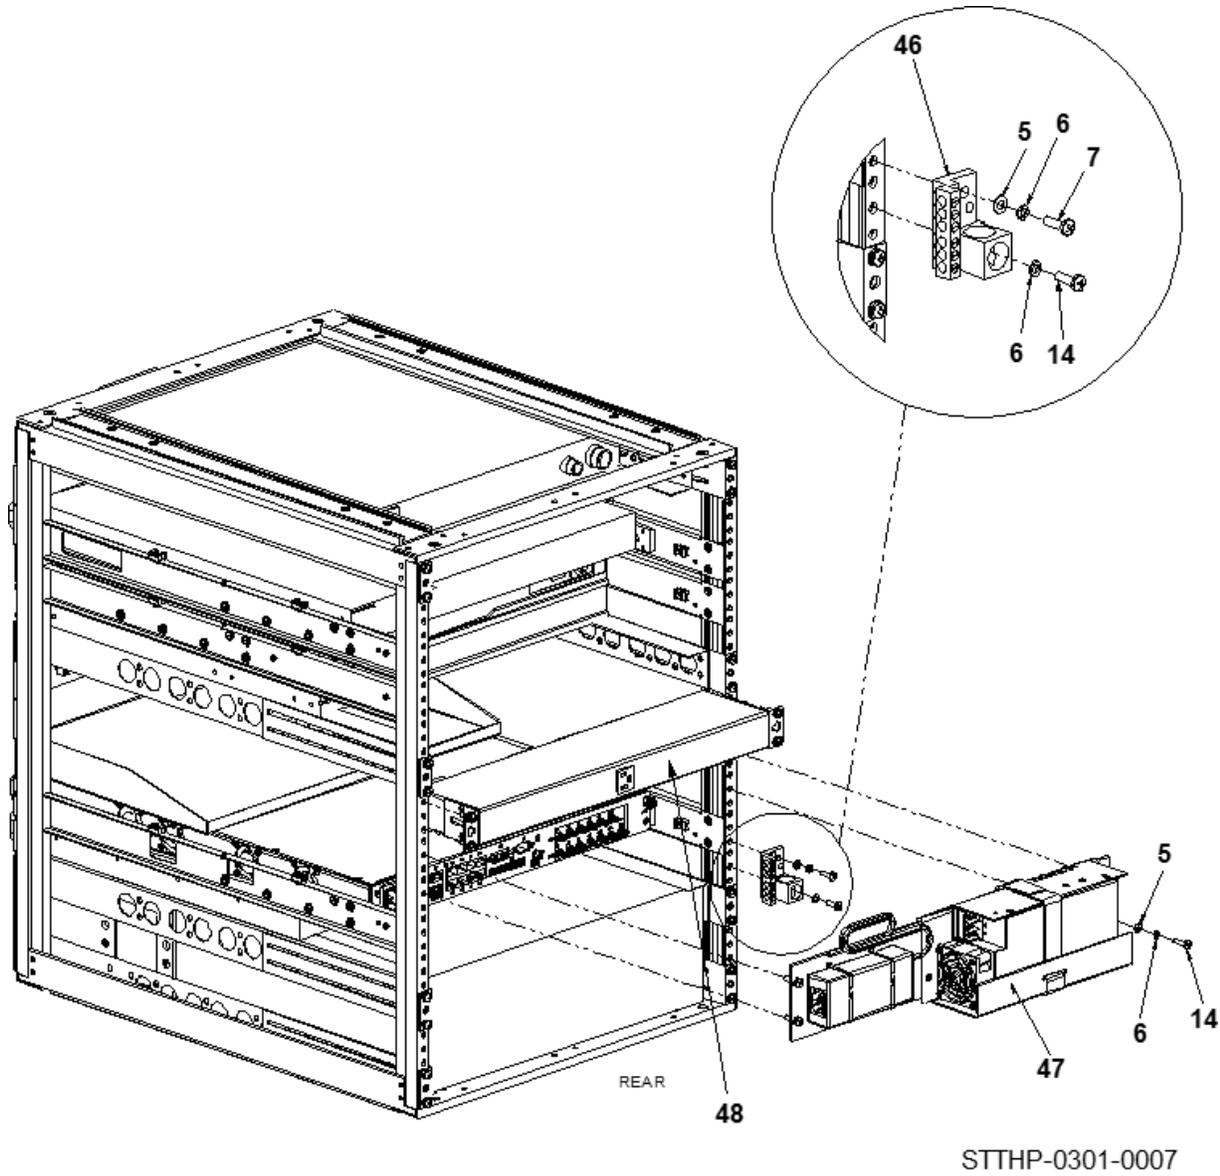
Electronics Components Assembly - Group 0301 (Sheet 7 of 9).
